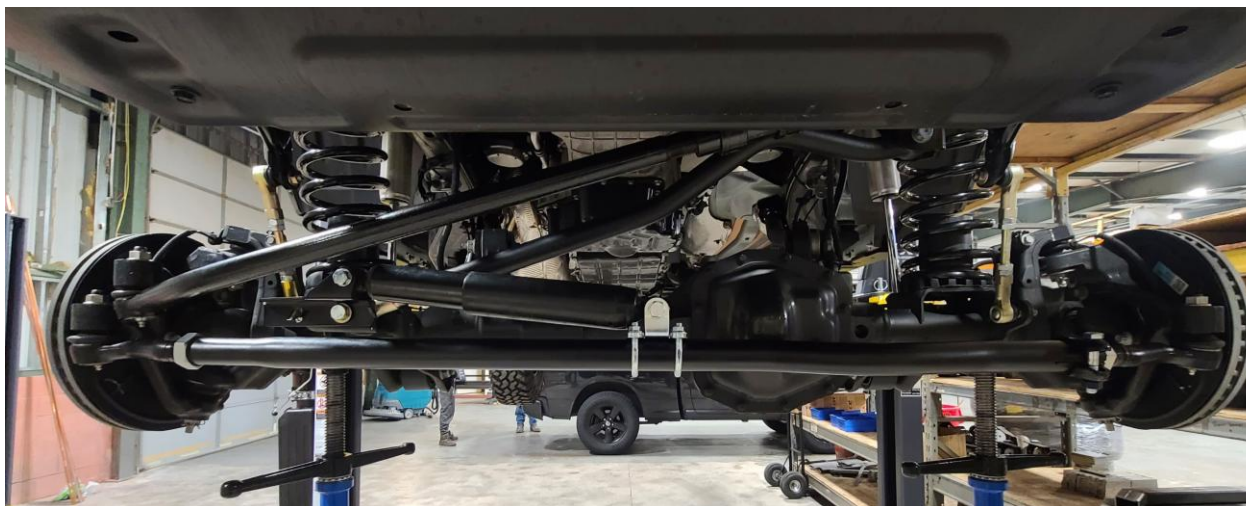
Front axle supported with two adjustable jack stands and tires removed
